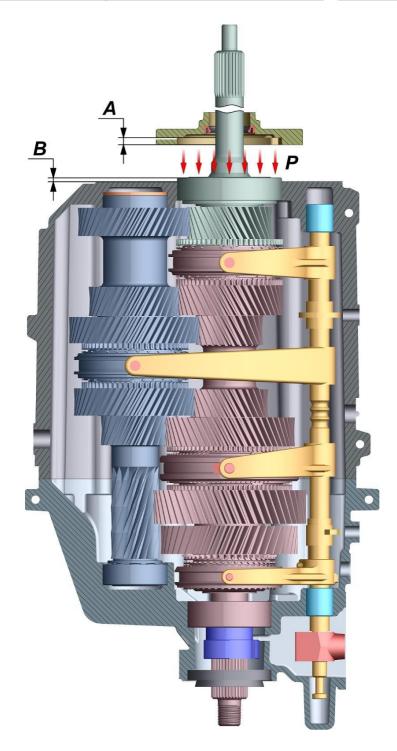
Secondary and primary shaft bearing adjustment ring thickness determination diagram
